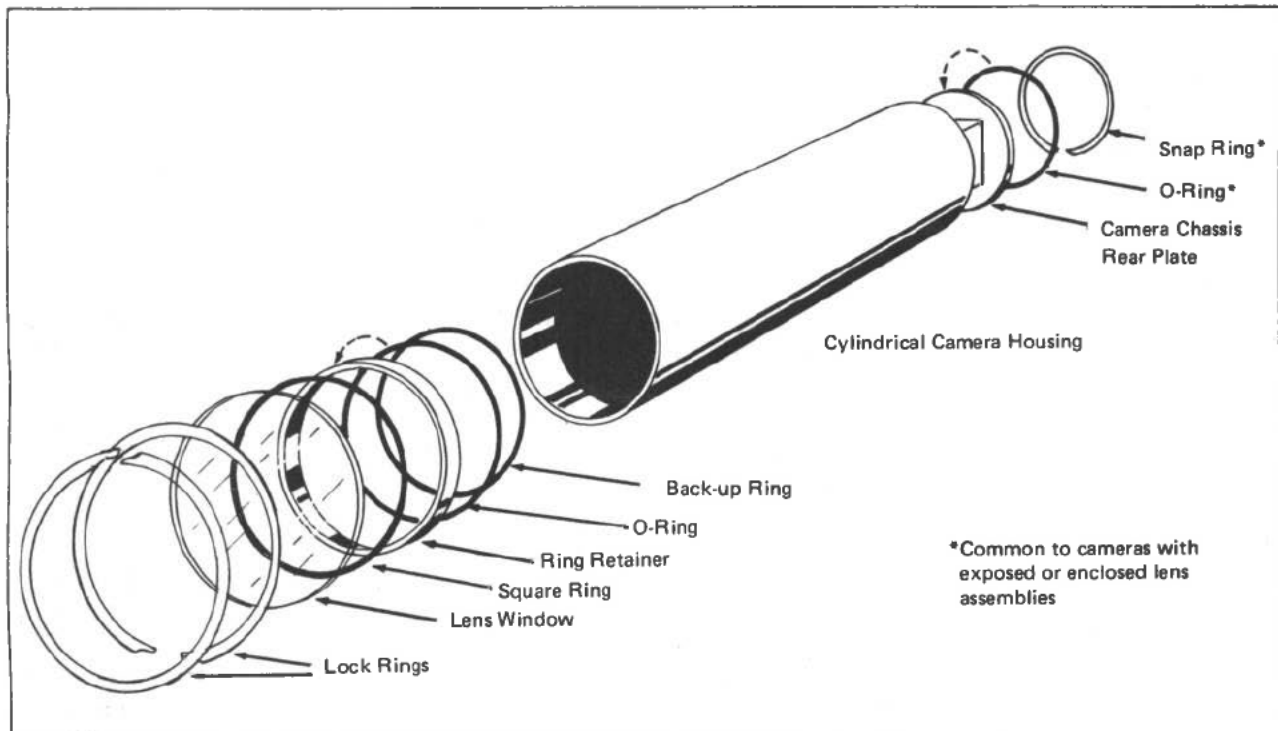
End Plate and Window Removed from Camera Barrel Housing.
